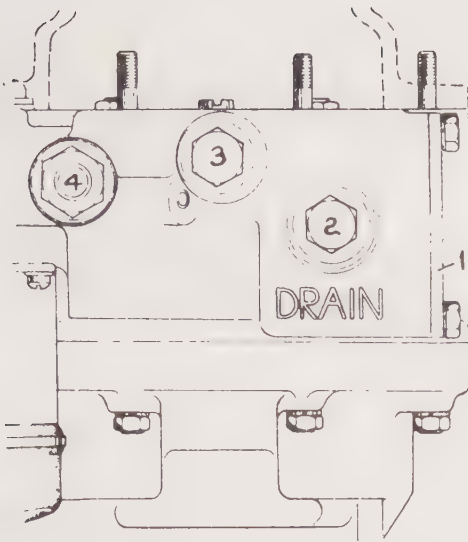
7 Under view of overdrive casing, showing access plugs, etc.
